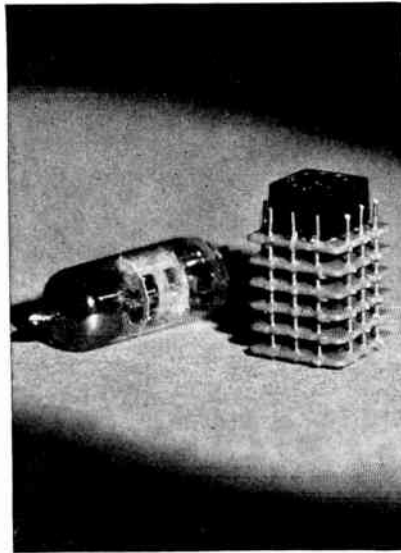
A module assembly attached to a tube socket. The wire extensions are used to make connection to the chassis circuitry and to support the assembly. (ACF Electronics photo)
